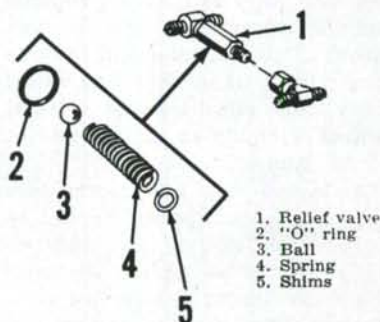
Exploded view of the relief valve assembly. Refer to B—Fig. 10 for location.
